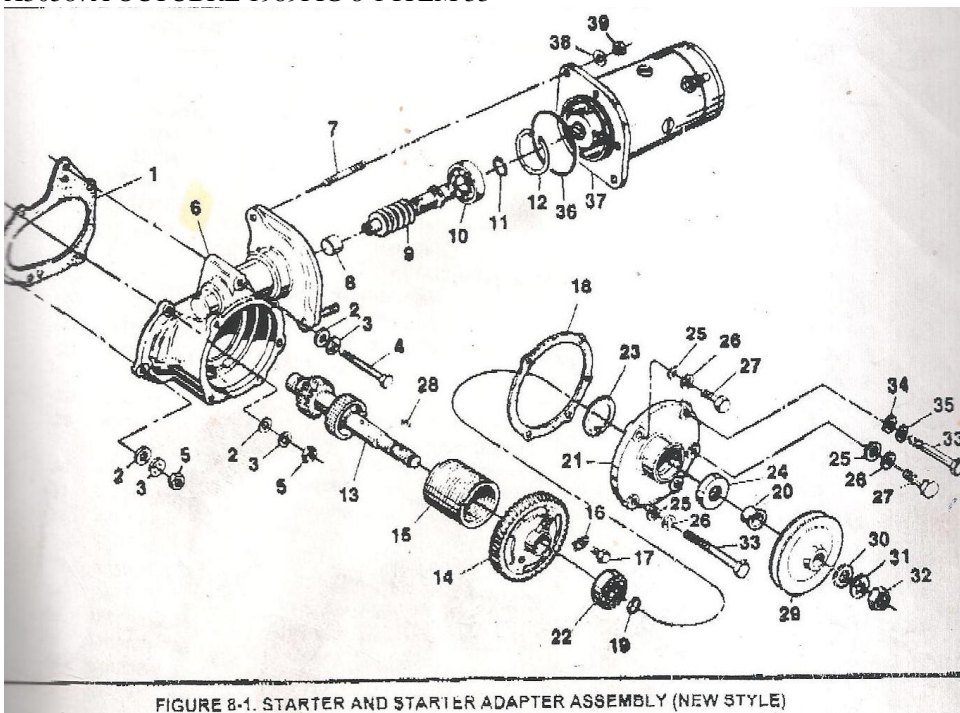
STARTER AND STARTER ADAPTER ASSEMBLY (NEW STYLE)
